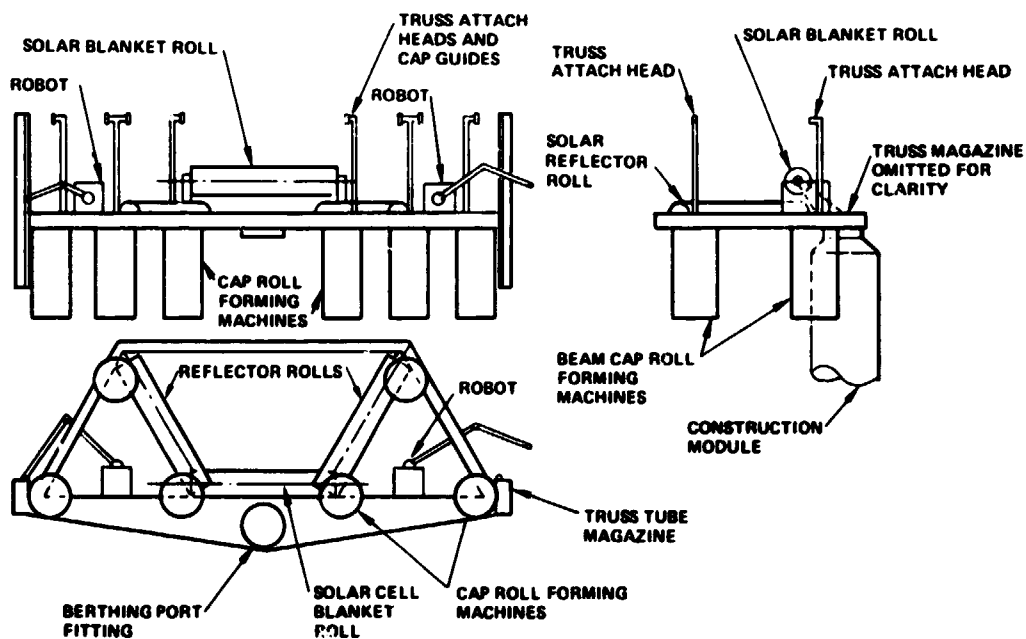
Test Article-2 Automated Solar Collector Fabrication and Assembly Jig
